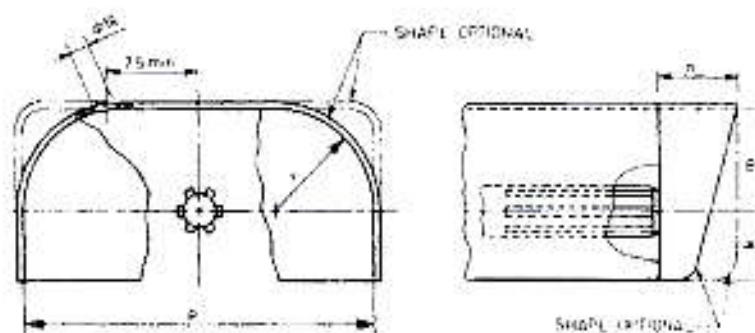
(b): DIMENSIONAL NOTATIONS FOR PTO SHAFT MASTER SHIELD
